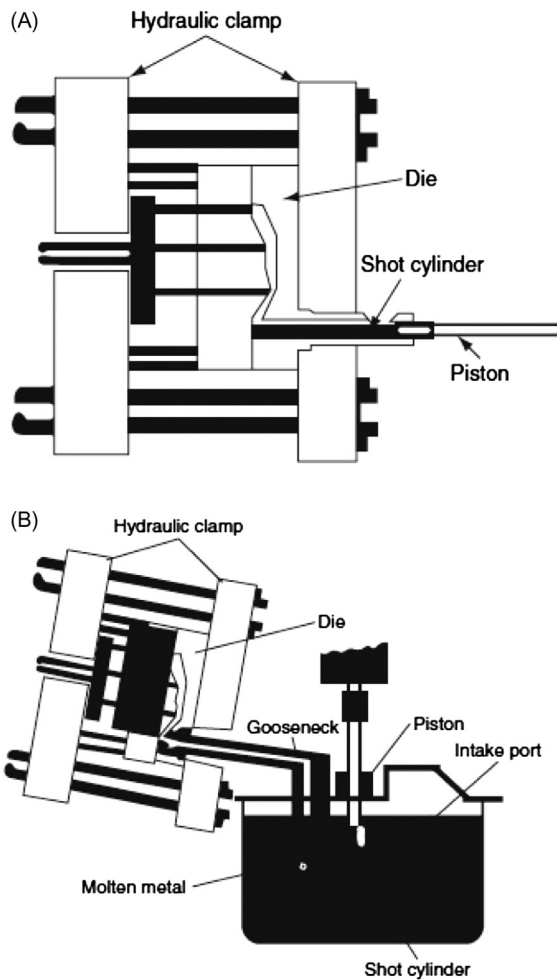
(A) Cold-chamber and (B) hot-chamber pressure die casting machines. Courtesy H. Westengen.
